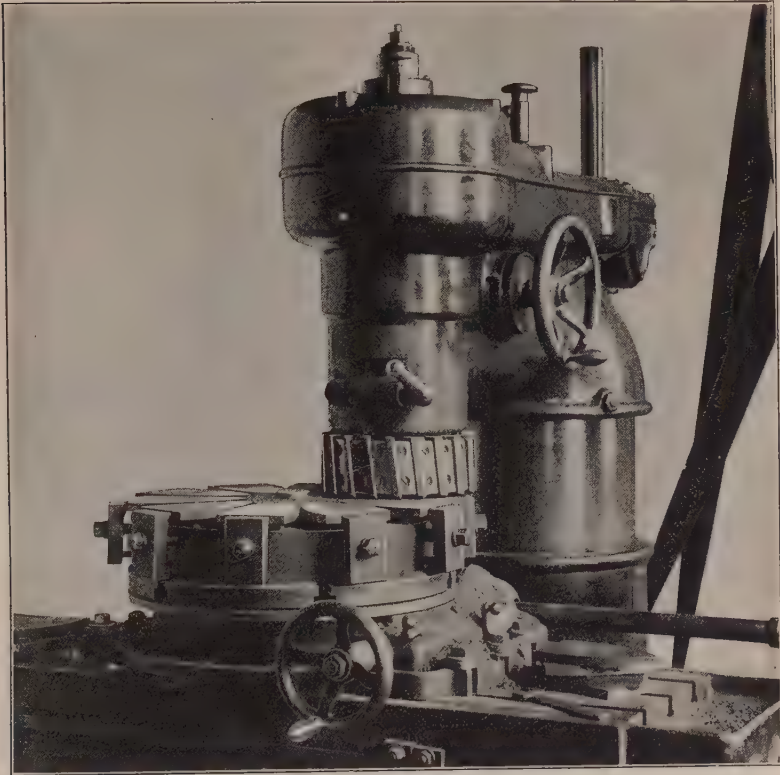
A Brown & Sharpe Vertical Miller fitted with Constantly Rotating Work Table and Series of Jigs for Continuous Milling. Work is changed without stopping Rotary Feed.
